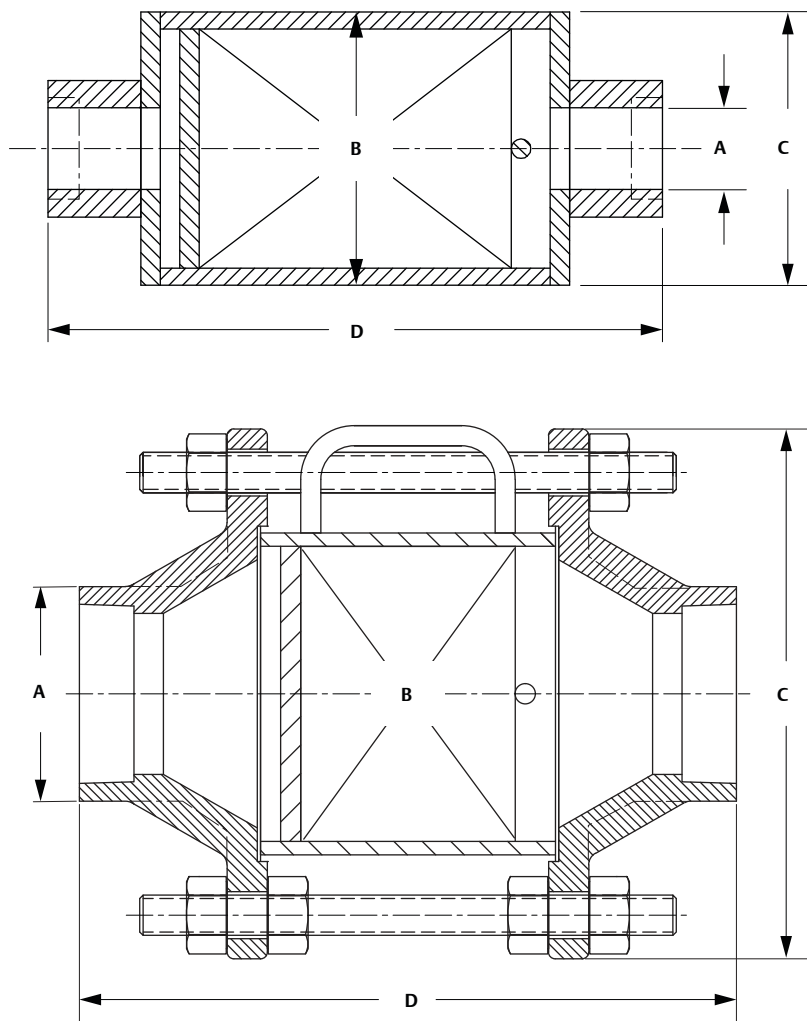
Threaded In-Line Flame Arrestor Dimensions
